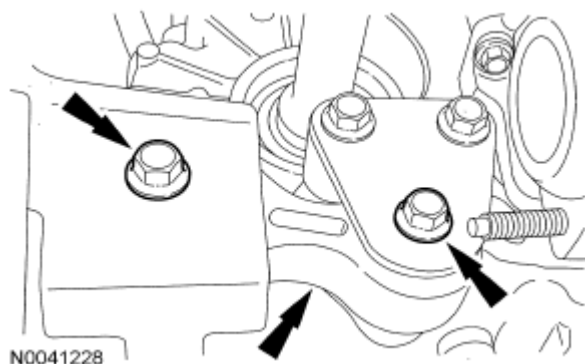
Identifying Engine Roll Restrictor And Bolts
